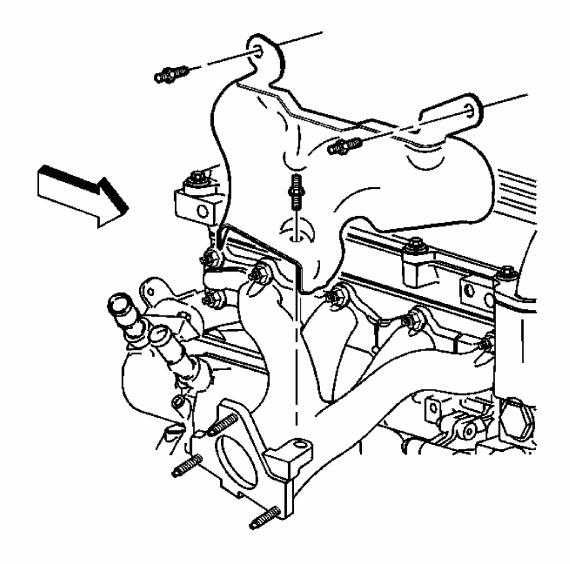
Removing & Installing Exhaust Manifold Heat Shield Courtesy of GENERAL MOTORS CORP.
